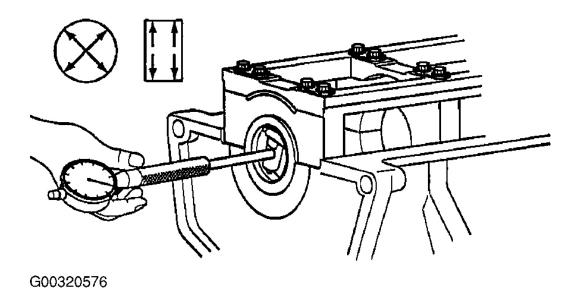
Measuring Oil Clearance Courtesy of KIA MOTORS AMERICA, INC.
